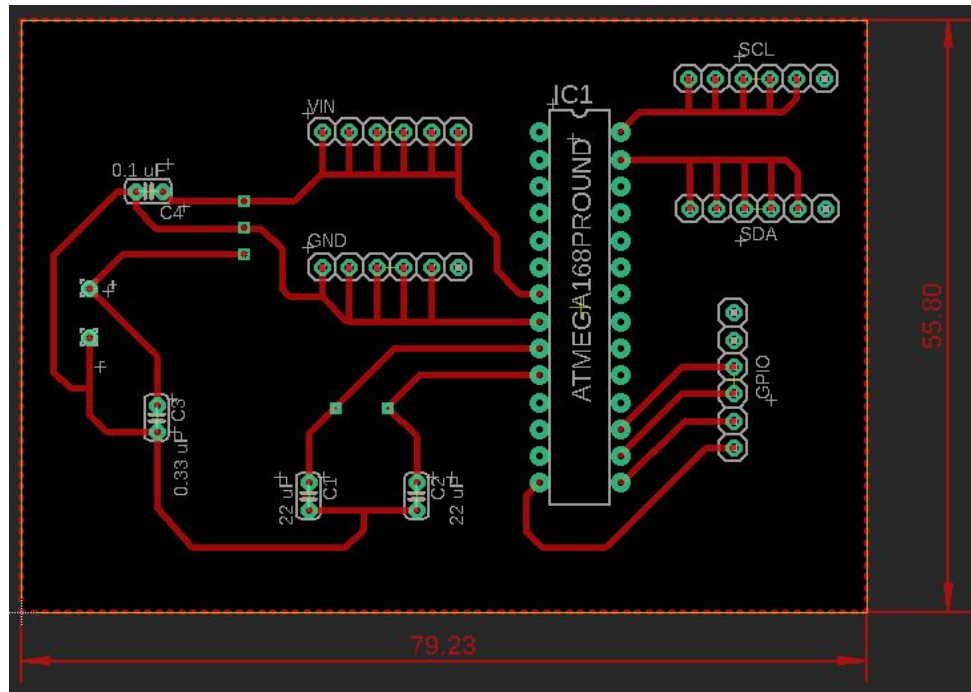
PCB schematic for microcontroller (dimensions in mm)
